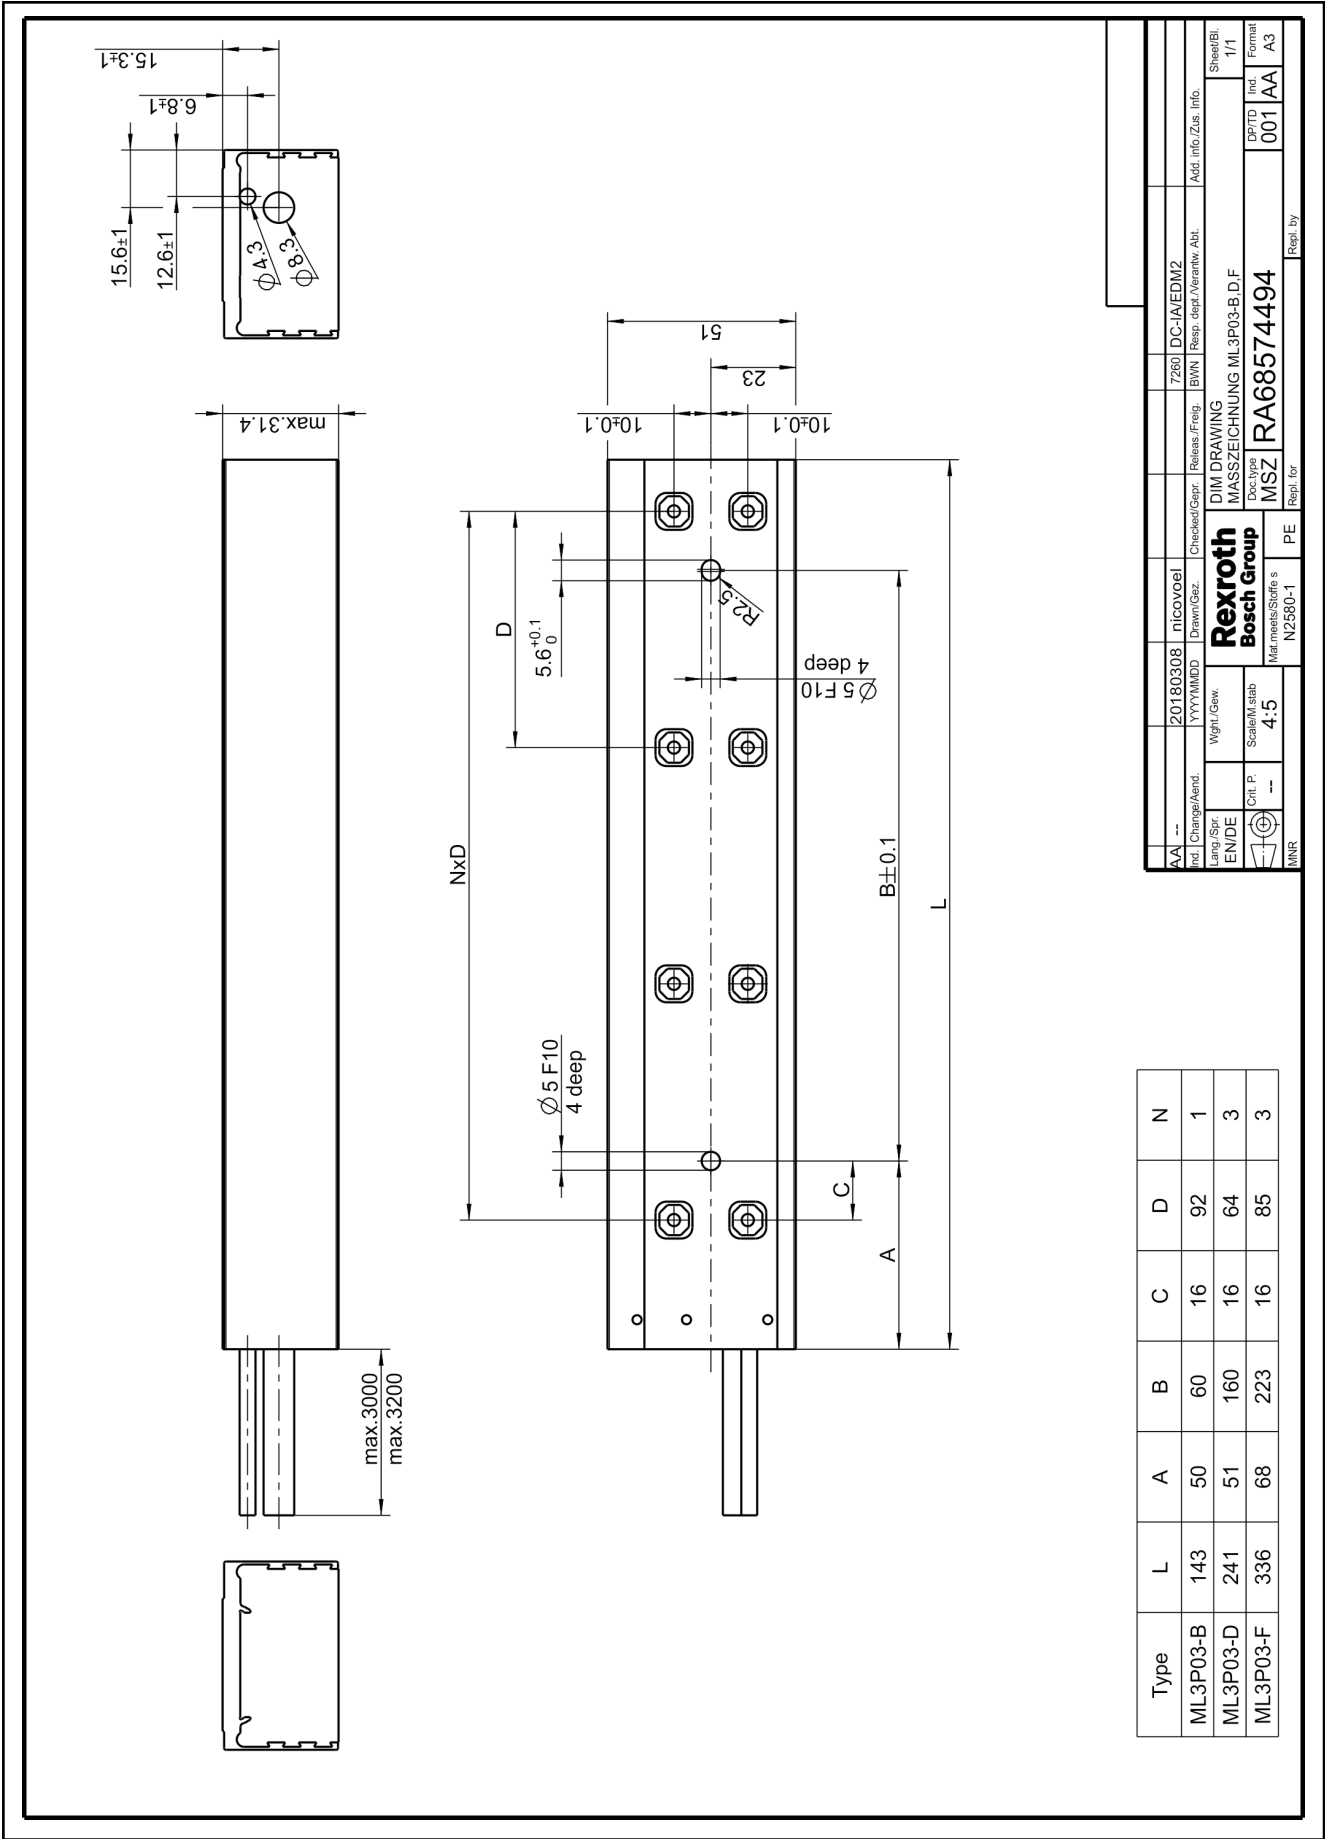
Dimension sheet primary part ML3P03-B/D/F
